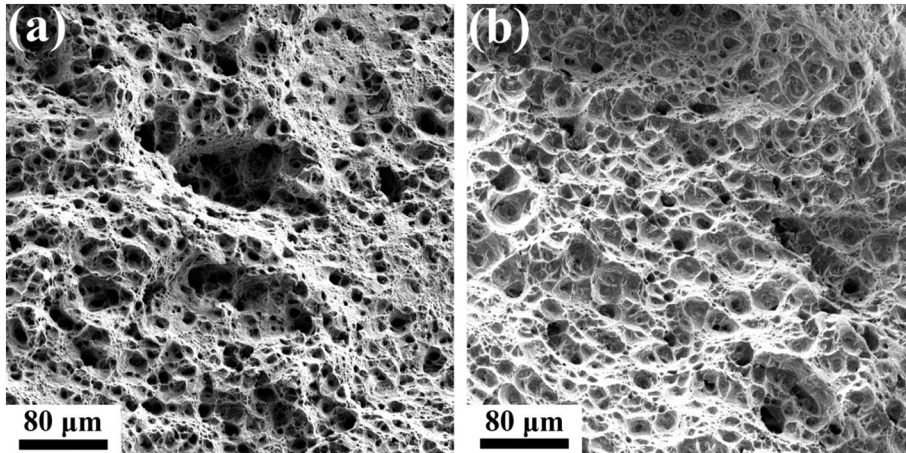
Fracture surfaces of (a) BM and (b) FSP sample.
